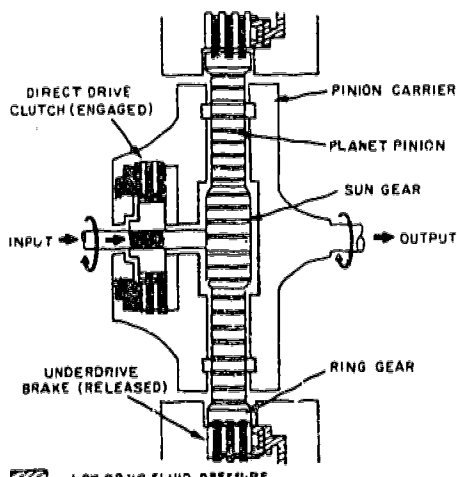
illustrates the simplest application of planetary gears in a transmission. With the arrangement shown, two forward speeds and neutral are possible. High gear or direct drive is shown. The clutch is holding the planet carrier to the input shaft causing the carrier and sun gear to rotate as a single unit. With the clutch released, all gears are free to rotate and no power is transmitted to the output shaft. In neutral, the planetary carrier remains stationary while the pinion gears rotate on their axes and turn the ring gear. Should the brake be
